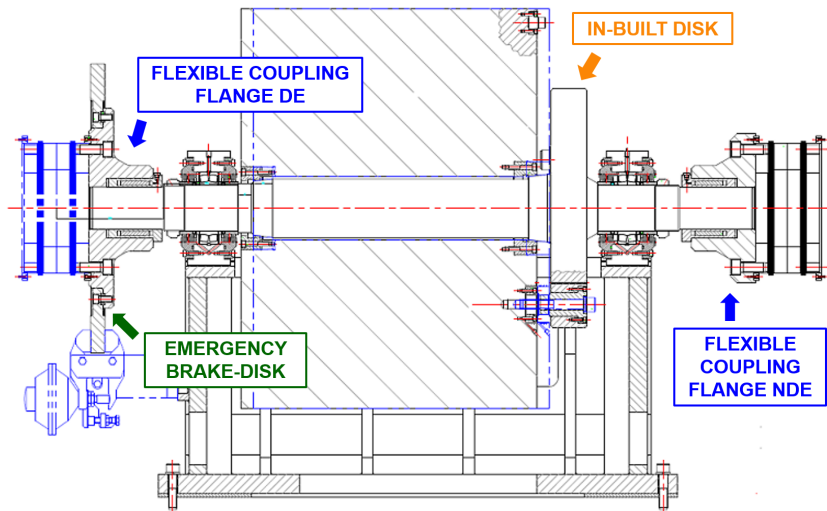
Components of the flywheel modules modelled as disk elements.
